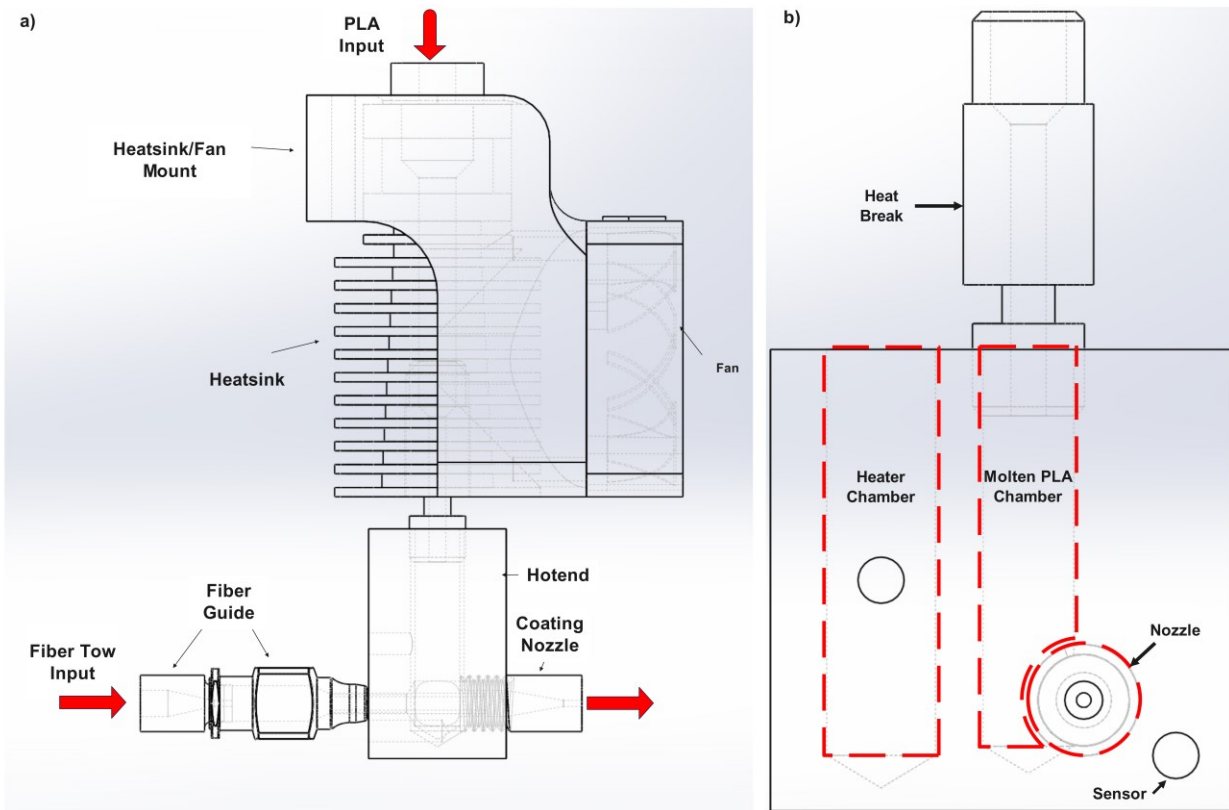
CPCF coating apparatus: full assembly side view (a) and hot end front view (b)
